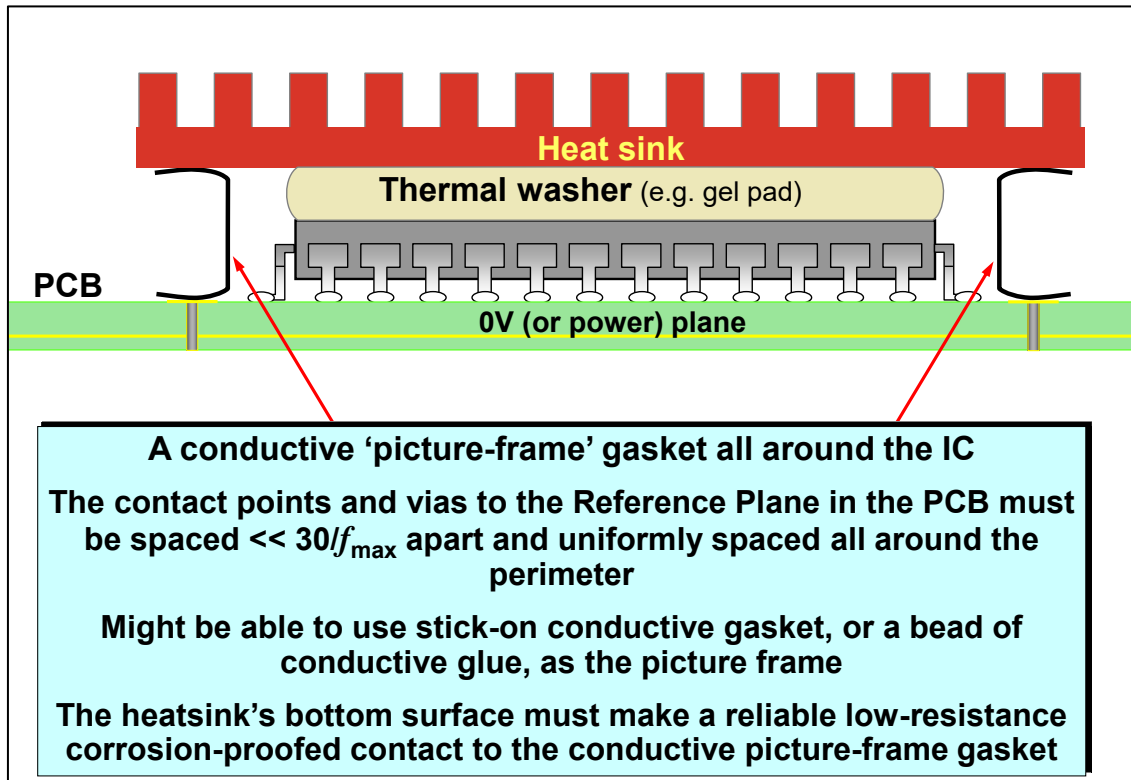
Example of combining shielding and heatsinking for an IC on a PCB
